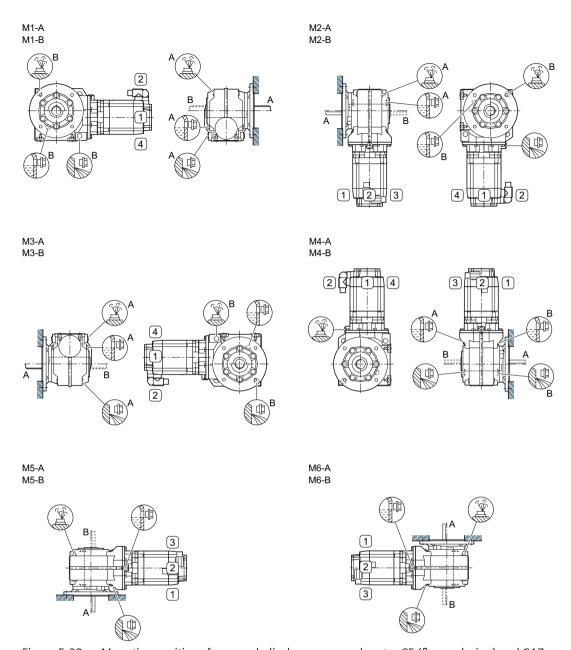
Mounting positions for servo helical worm geared motor CF (flange design) and CAZ (housing flange design), frame size 49 - 89, 2 stage
